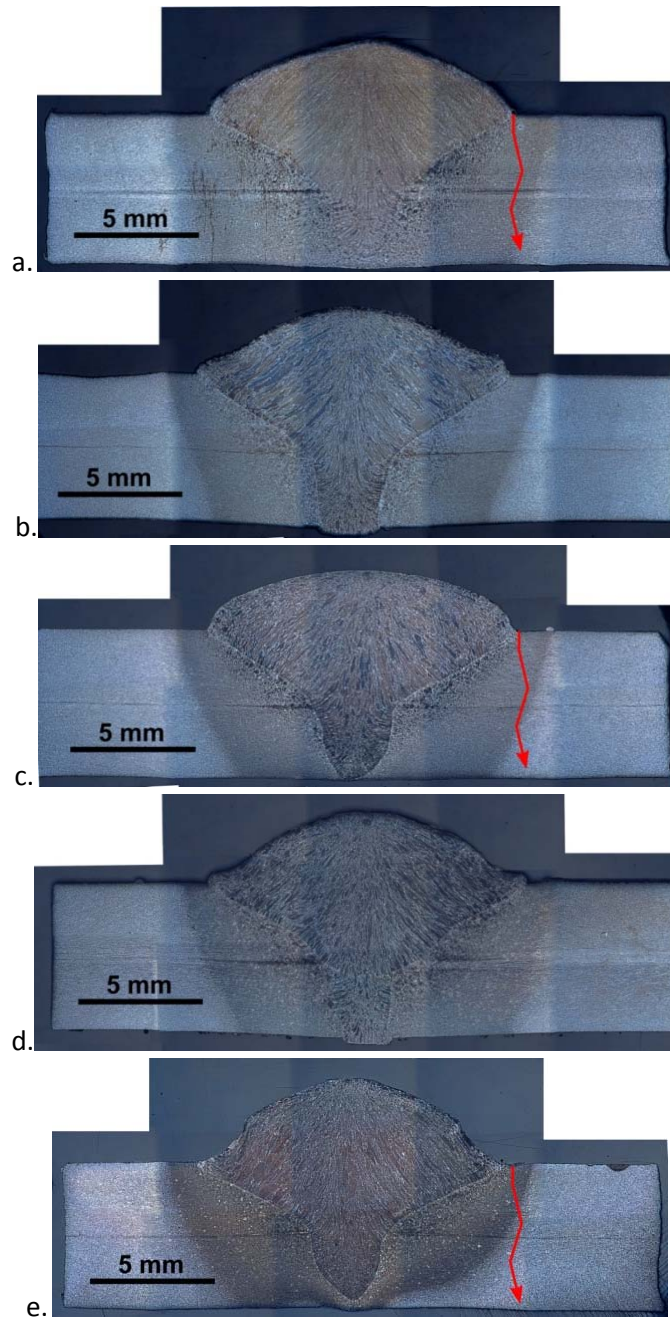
Composite macrographs showing a cross-section of each weld: (a.) No rolling, (b.) Roller A, (c.) Roller B, (d.) Roller C, (e.) Roller D. Red arrows show the approximate location of crack propagation during the fatigue tests.
